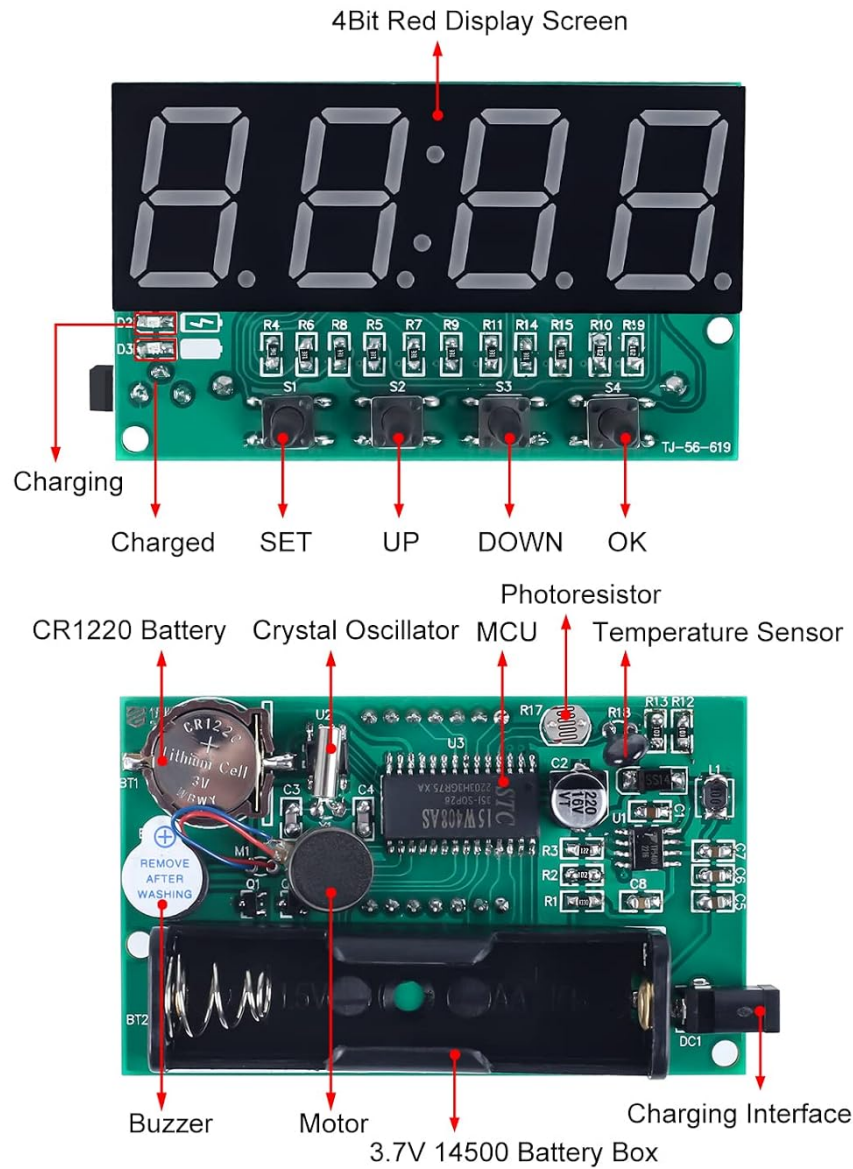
Detailed view of the clock's Printed Circuit Board (PCB), showing key components such as the charging port, control buttons (SET, UP, DOWN, OK), photodiode, crystal oscillator, MCU, temperature sensor, buzzer, motor, and 3.7V 14500 battery box.
